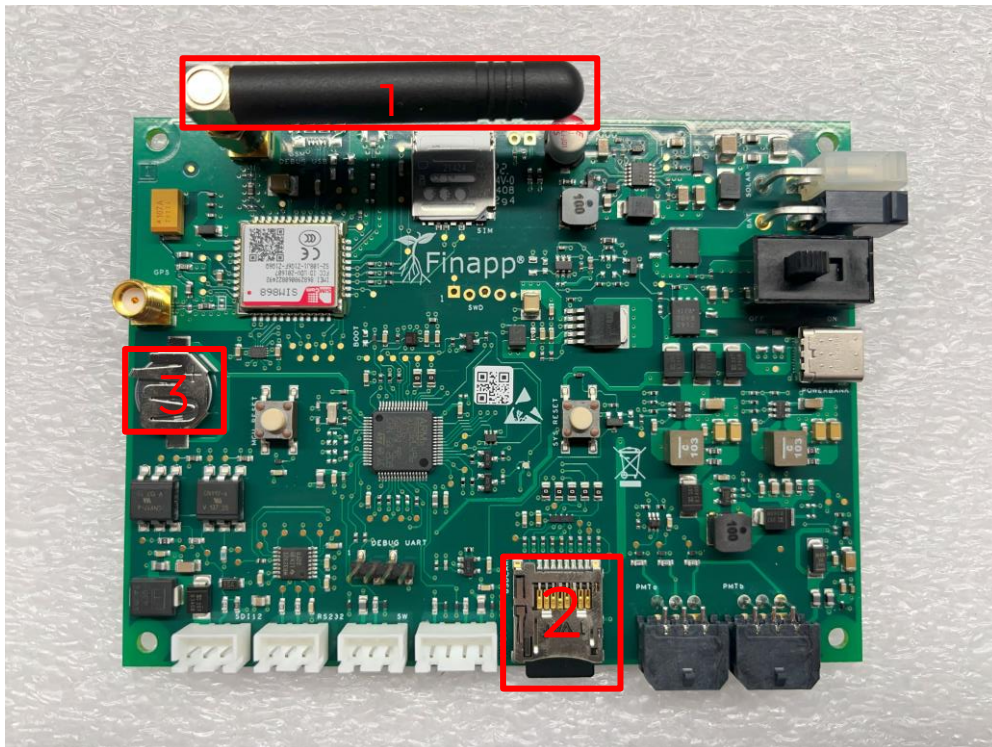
Location of the above components in the master board: 1- GSM antenna, 2- SD Card, 3- buffer battery
